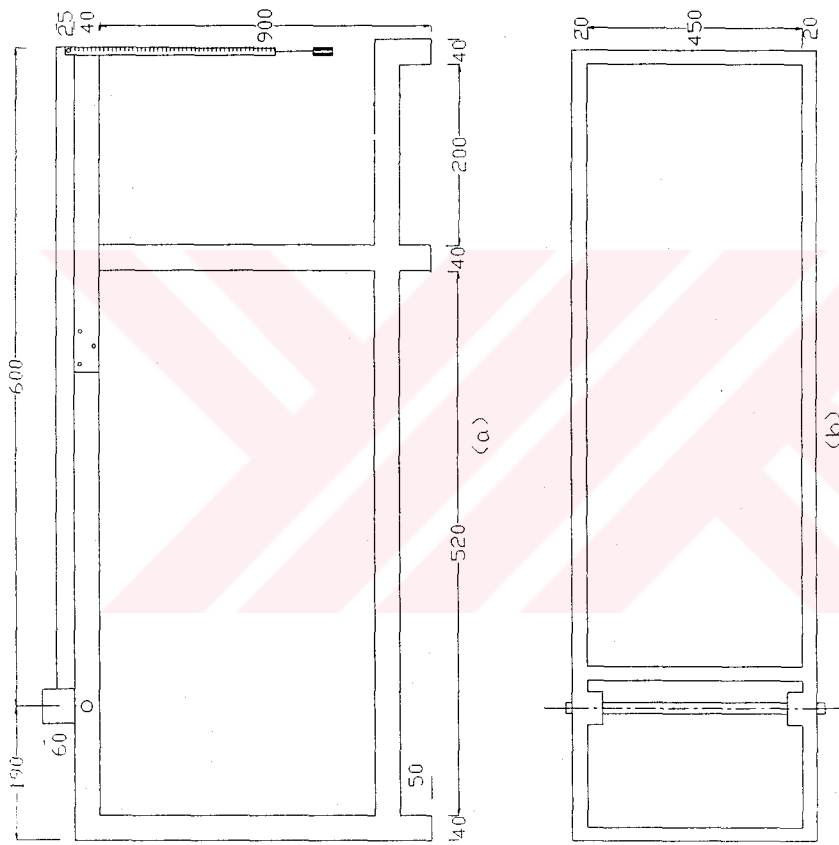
Steel Frame with Tilting Board: (a) Side View, and (b) Top View
